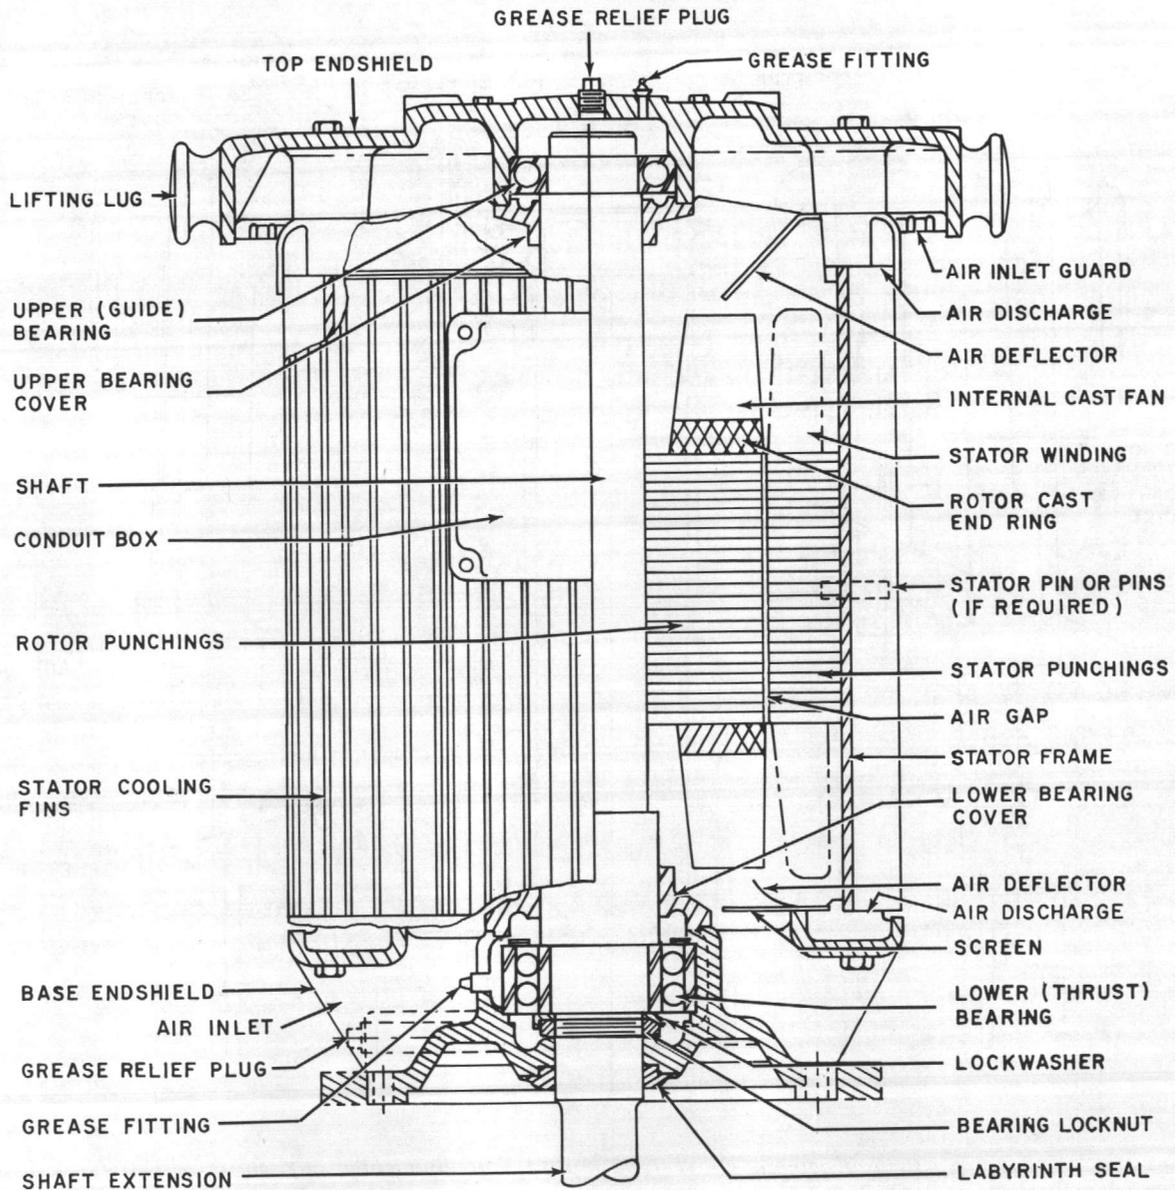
Special lower bearing construction for frames C, D, K254-405 or L213-256
